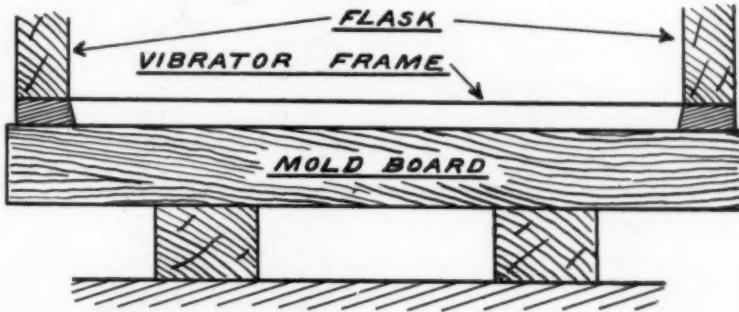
DIRECTION OF DRAFT IN VIBRATOR FRAME
